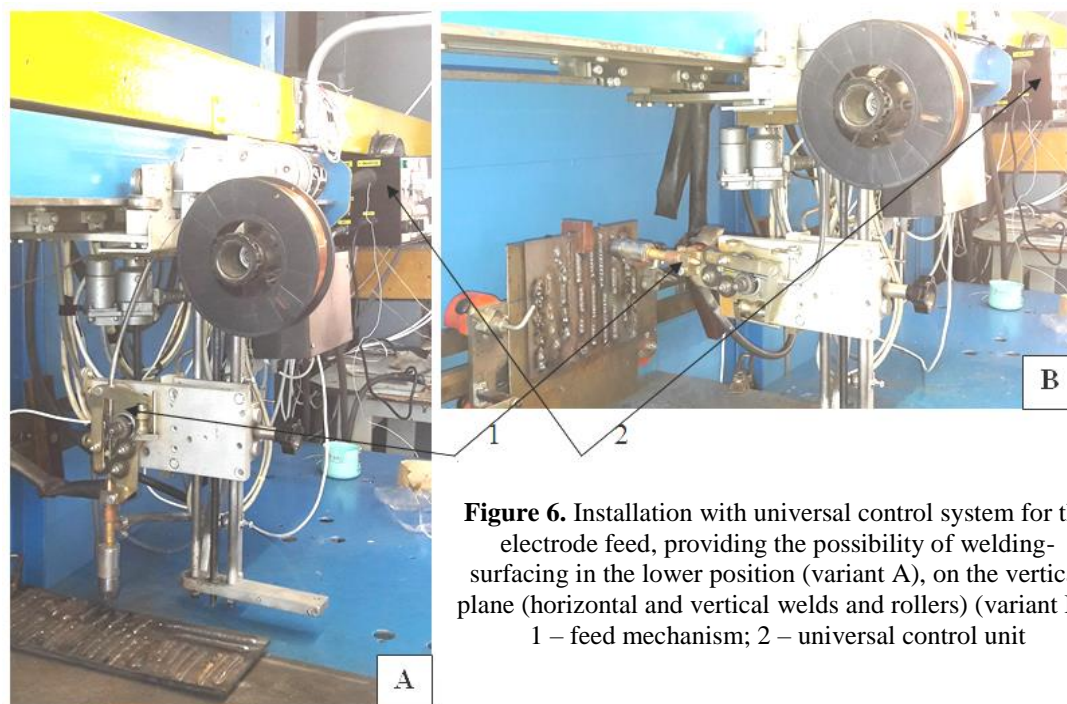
Installation with universal control system for the electrode feed, providing the possibility of welding-surfacing in the lower position (variant A), on the vertical plane (horizontal and vertical welds and rollers) (variant B):
